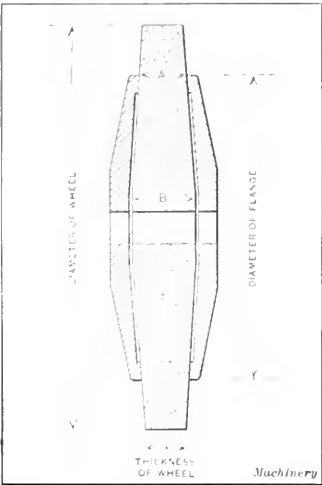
Sectional View of Tapering Grinding Wheel and Protection Flange
